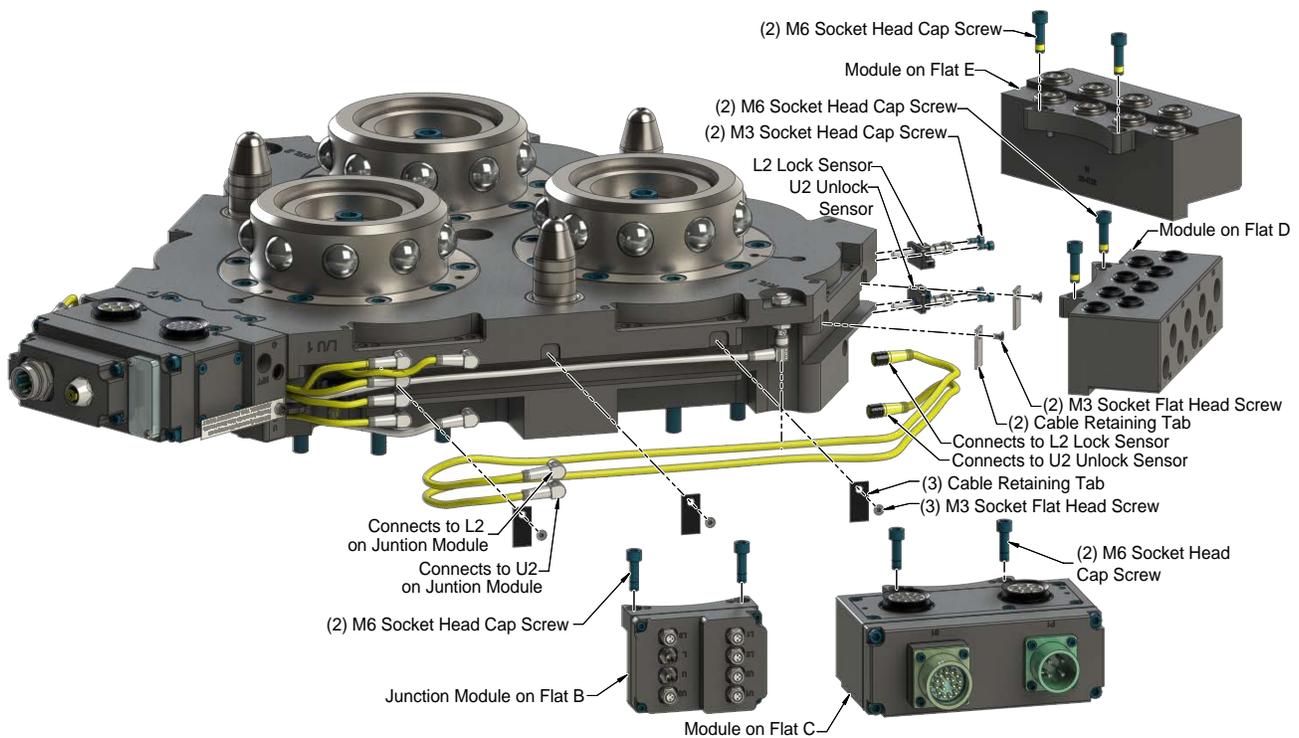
Lock/Unlock Sensor Removal and Installation
